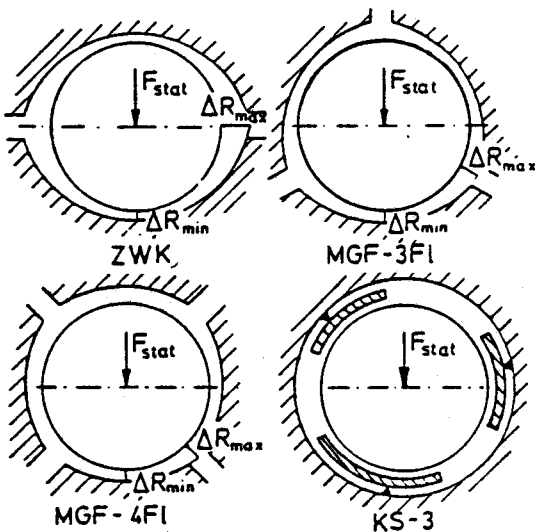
Multi-Lobe and Tilting pad Bearing.
